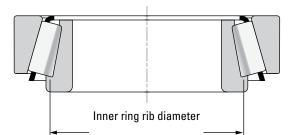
Cone rib diameter. The inner ring rib diameter may be scaled from a print.
